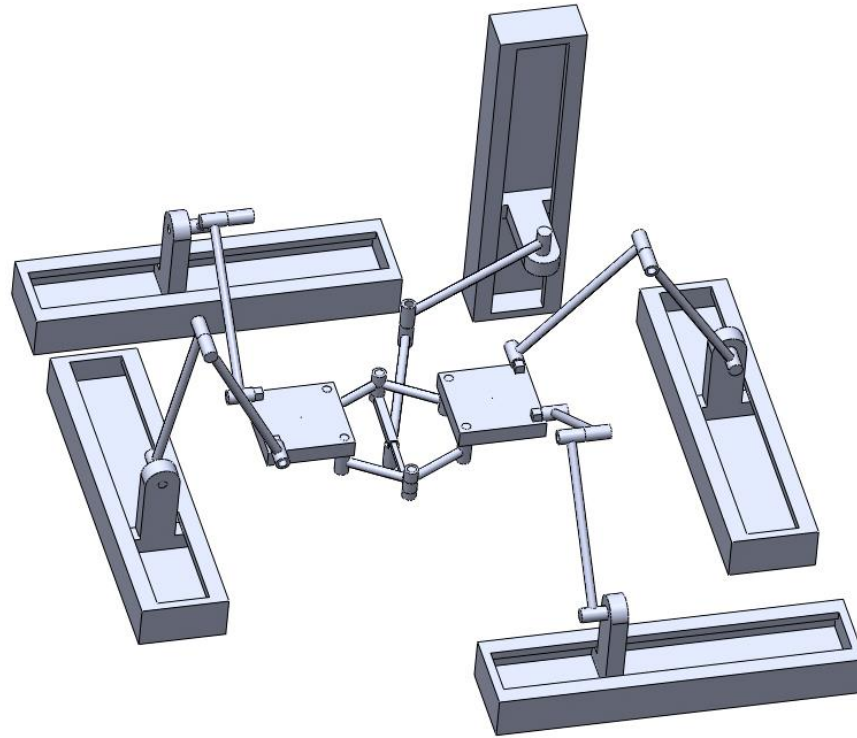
5-DOF Parallel Mechanism Design 1 assembly with *RPR* moving platform link
